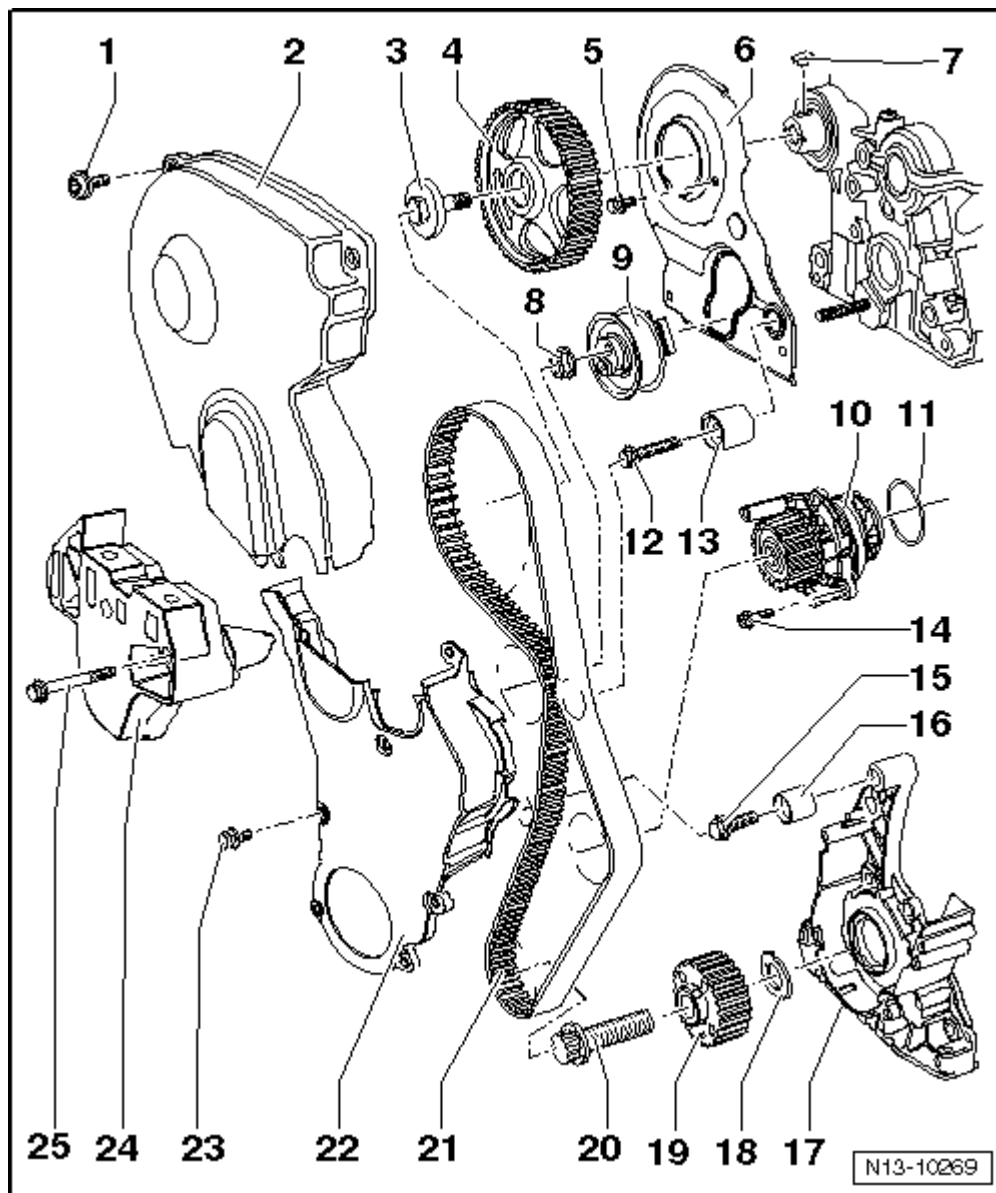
Identifying Engine Assembly Overview Part III, With Divided Toothed Belt Guard
